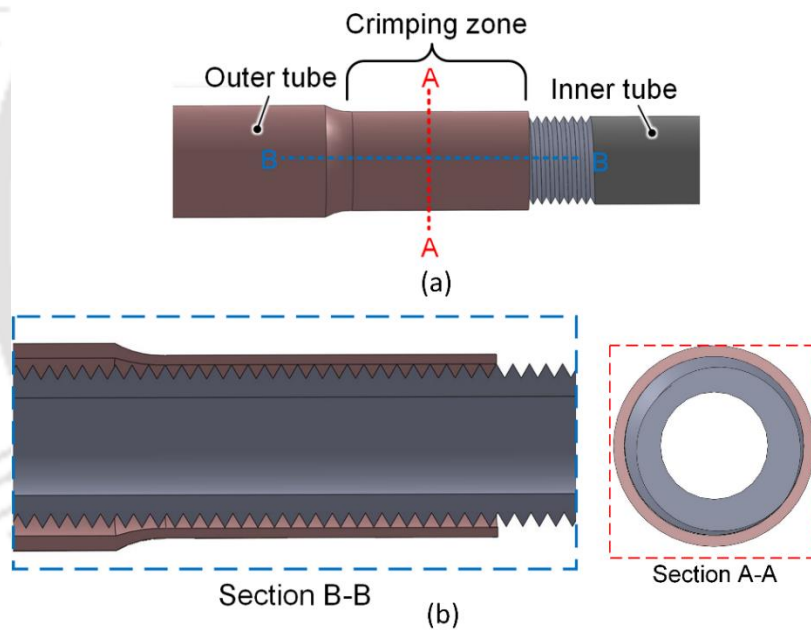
Schematic of (a) cutting pattern for a joined sample and (b) sectional views of the inner (SS) and outer (Cu) tubes
